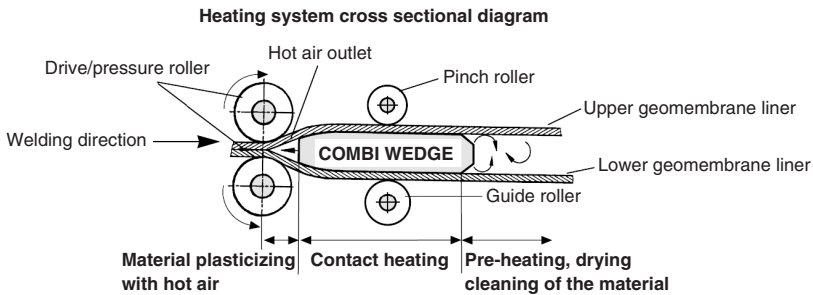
shows a schematic of a combination hot air welder and wedge welder.
